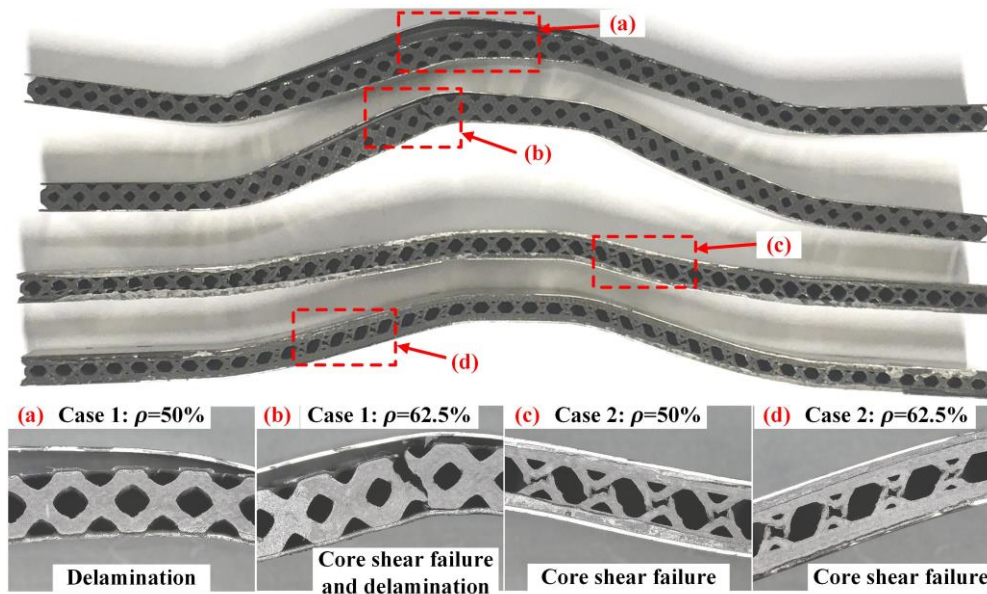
Deformed sandwich sheets and highlighted failure modes after draw-bending.
